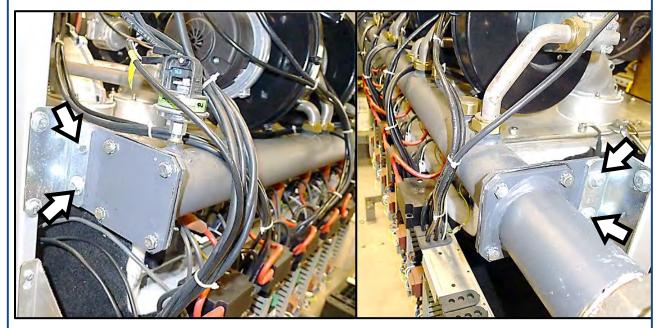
Uninstall Gas Collector Tube from Boiler Chassis (Step 12)
